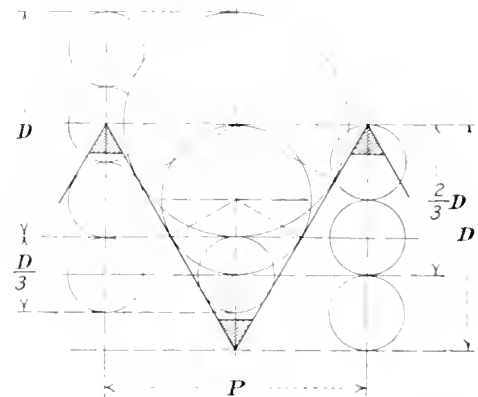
CHECKING ANGLE ON 60-DEG. THREADS WITH STANDARD BEST WIRES
